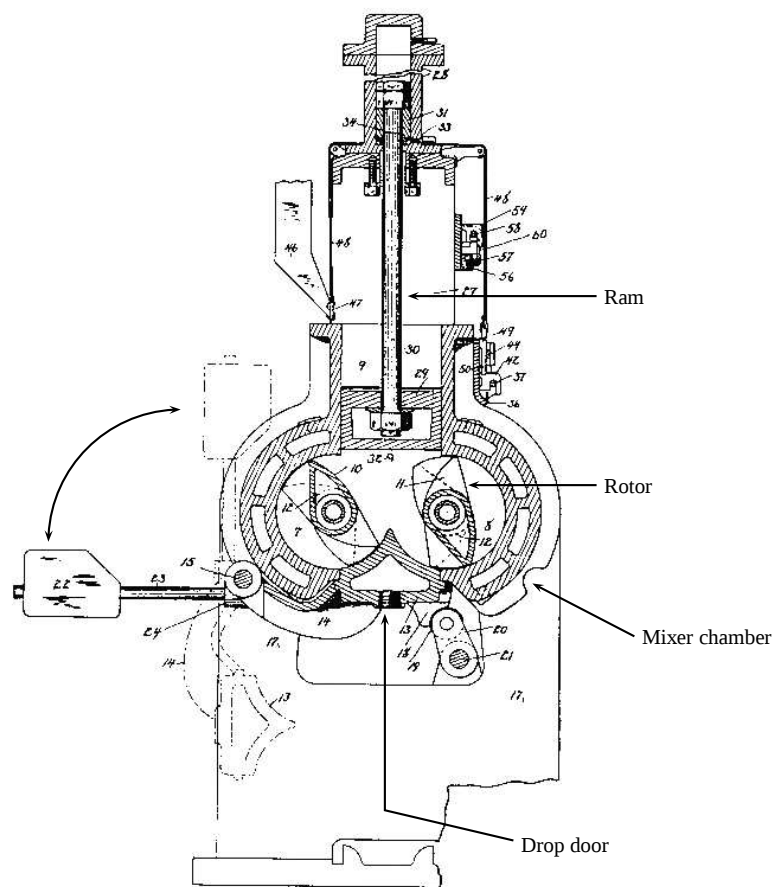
Inside view of internal batch mixer where we can see the mixer chamber, the rotors, the drop door and the ram (Drawing extracted from the book "Rubber Processing : Technology - Materials - Principles" (White,1995)).
